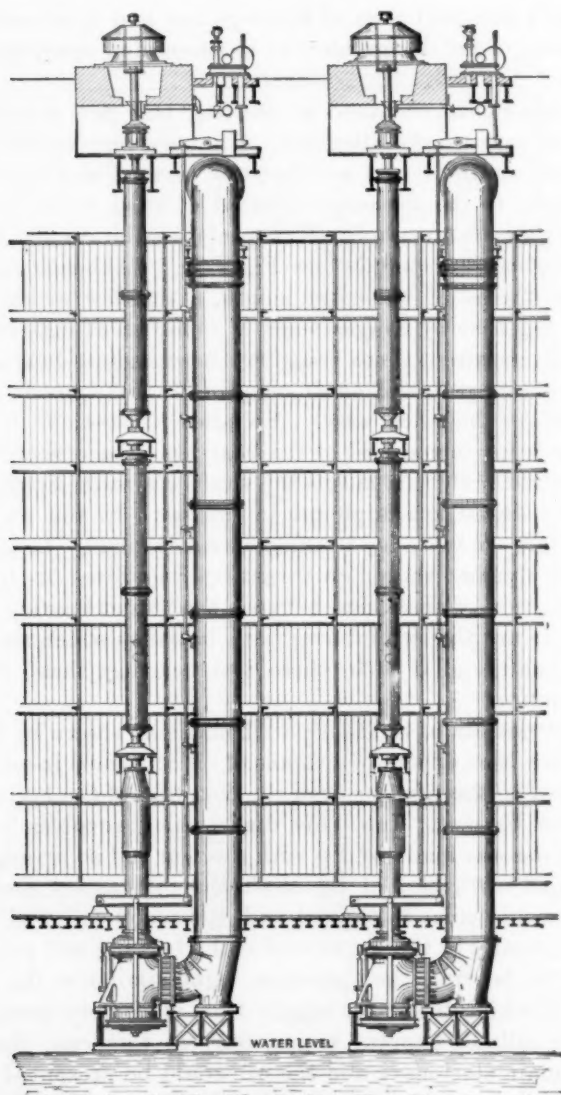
GENERAL ELEVATION. FAESCH & PICCARD DESIGN.
